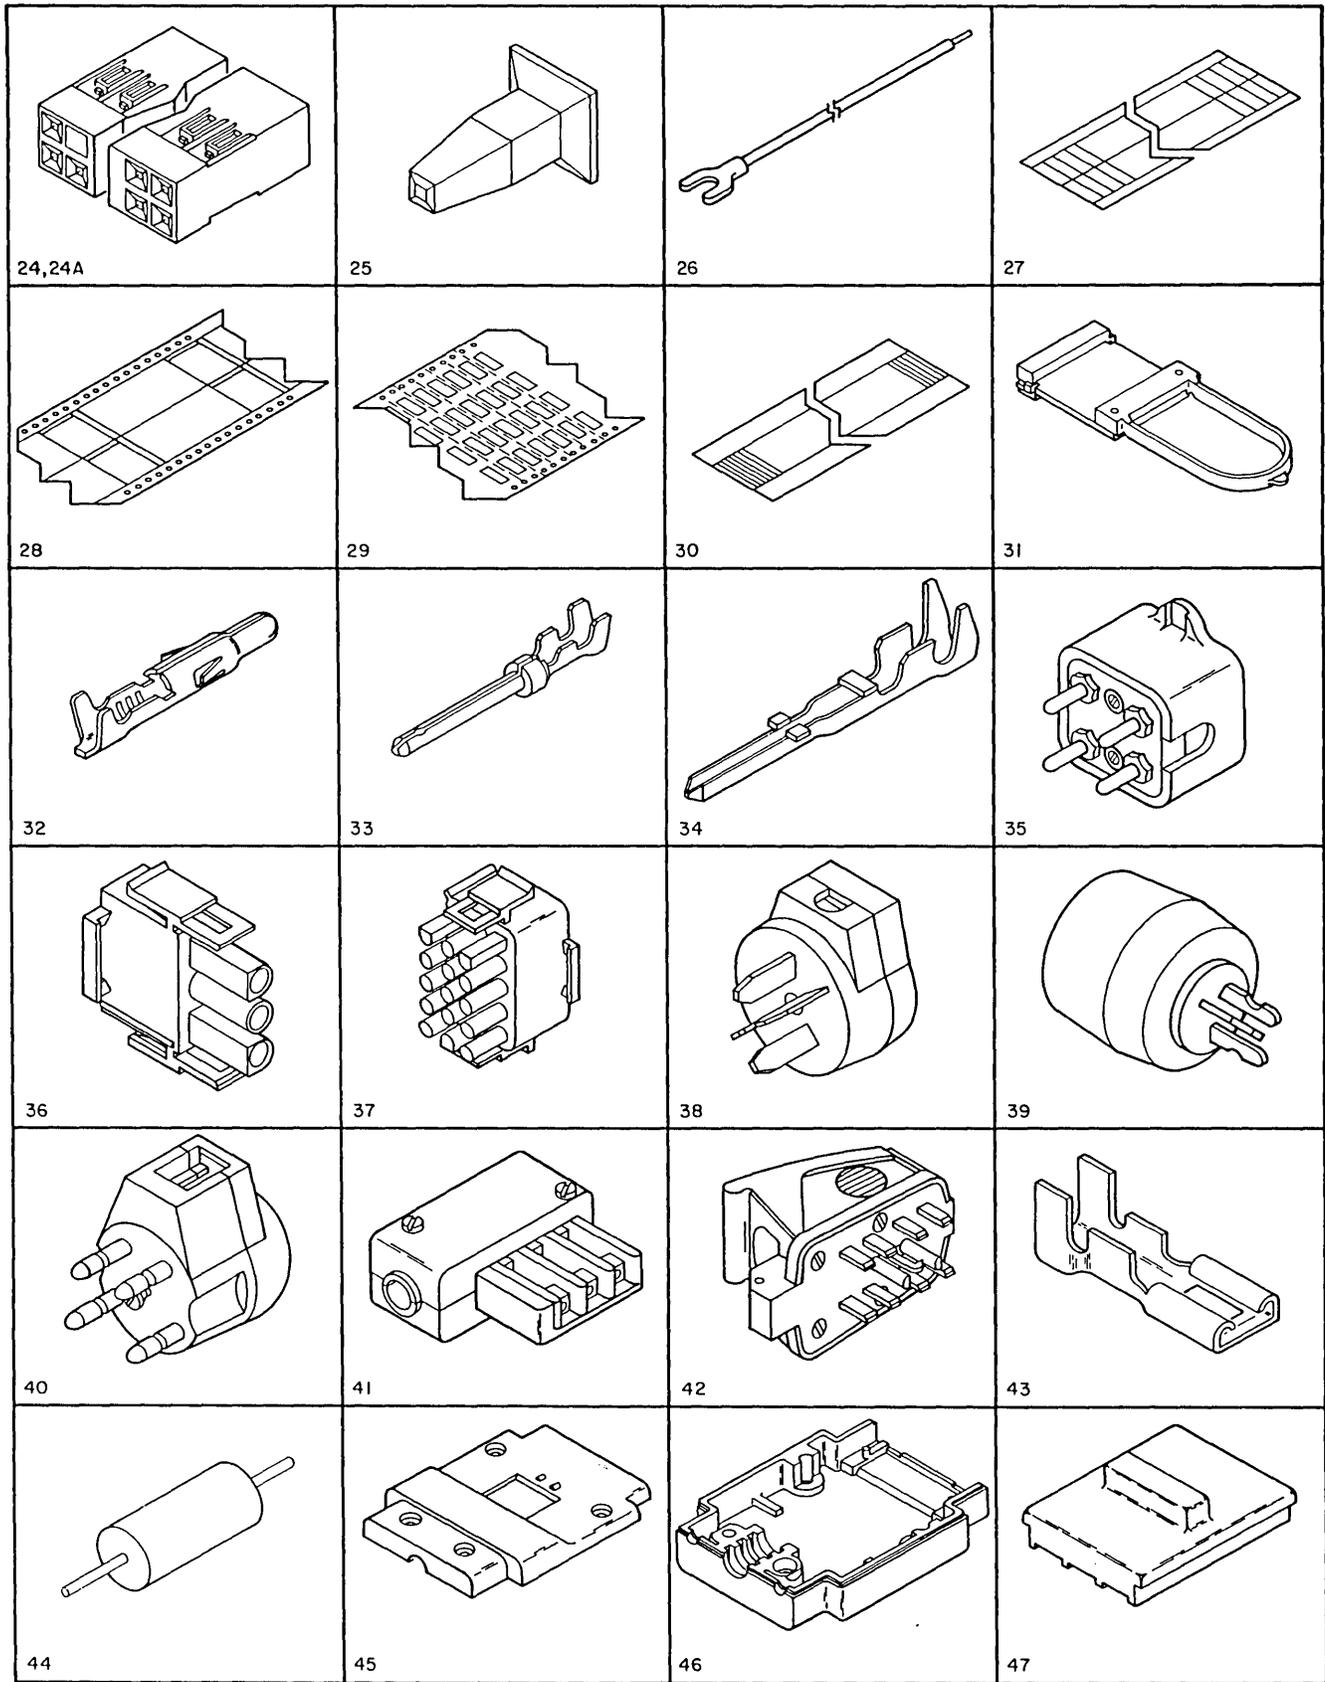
CABLE ASSEMBLIES WITH COMPONENT PARTS (SHEET 2 OF 3, INDEX NOS. 24-47)
